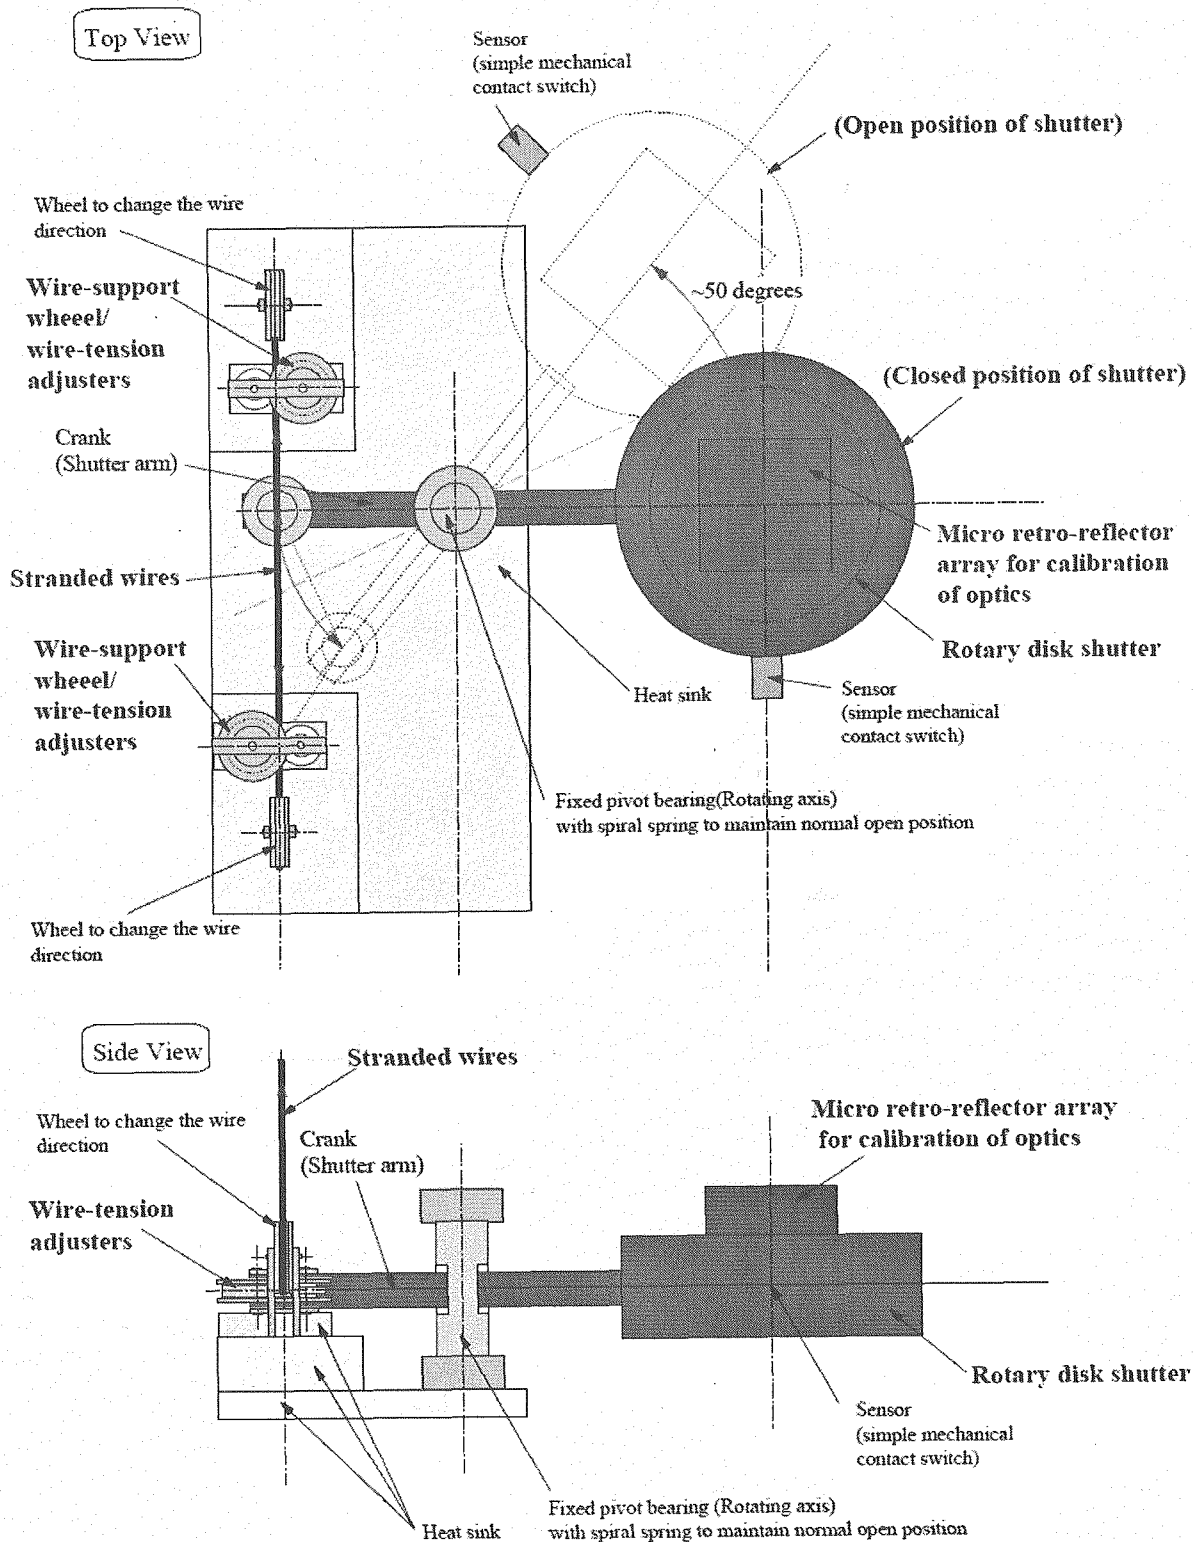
(b) Schematic diagram of the top and side views of the rotary disk shutter, and the part of the driving mechanism.
